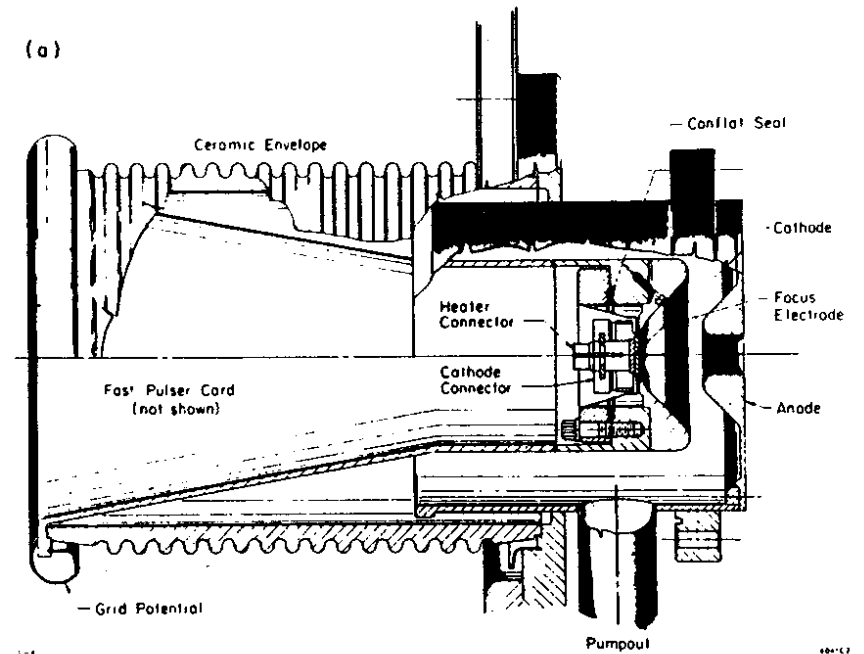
(a). Cut-away view of the CID thermionic gun assembly.
